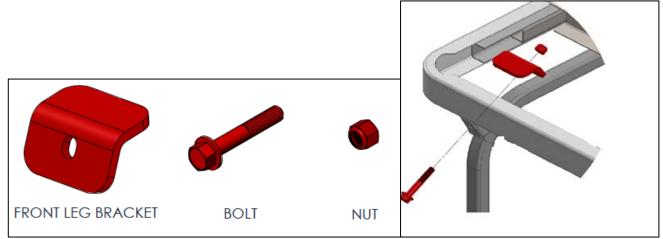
Additional Parts for 30 Inch and 32 Inch Seats
